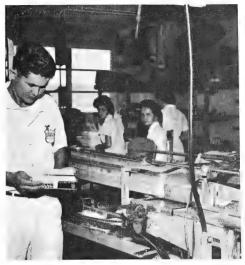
USDI inspector examining package coding for the purpose of identification.
